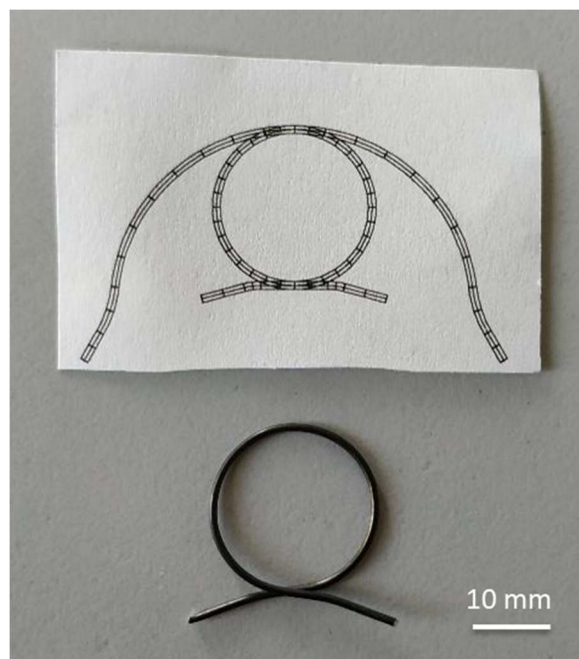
Objective shape and shape-set SMA spring. The drawing of the spring design shows both the closed shape that the spring has been set in, and the open shape it will be deformed into, prior to being inserted into the final device.
